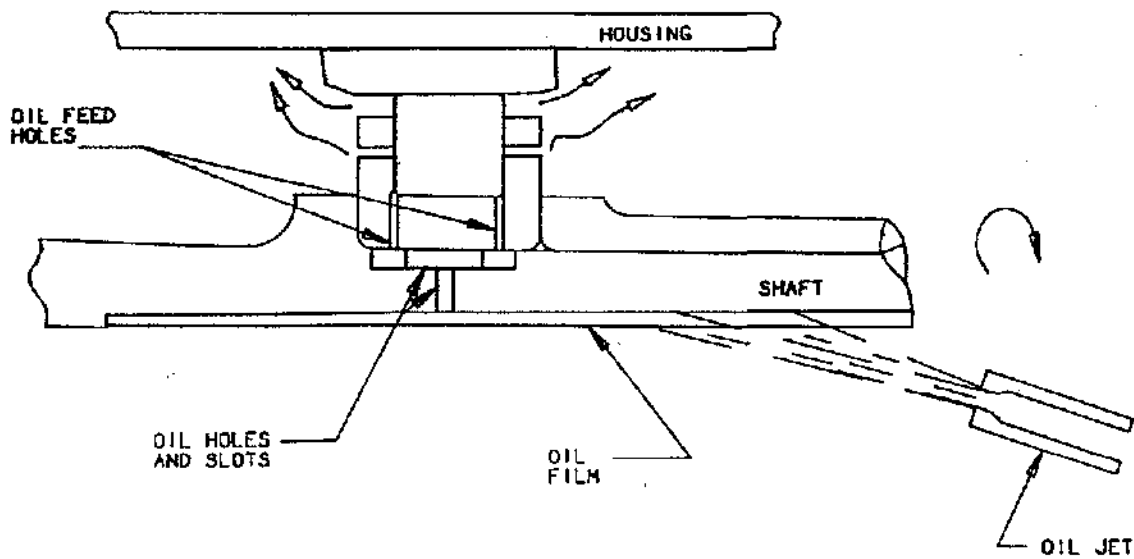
Under-Race Oil Cooling Scheme For A High Speed Roller Bearing
